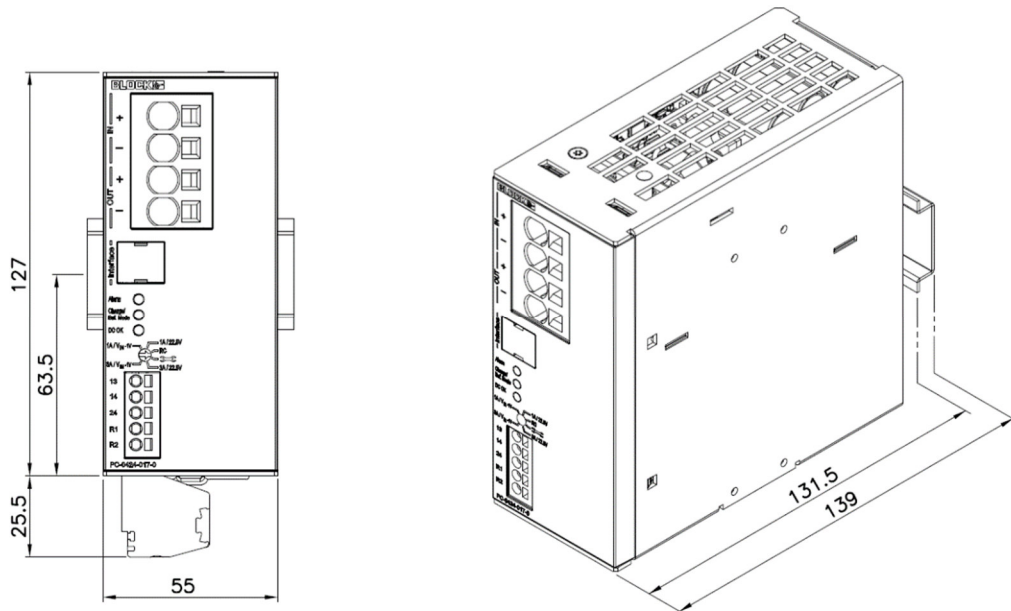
Dimension (PC-0424-010-00/PC-0424-017-0)
